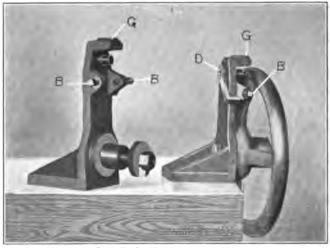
Drill Jig for Holes in Rim of Hand-wheel
